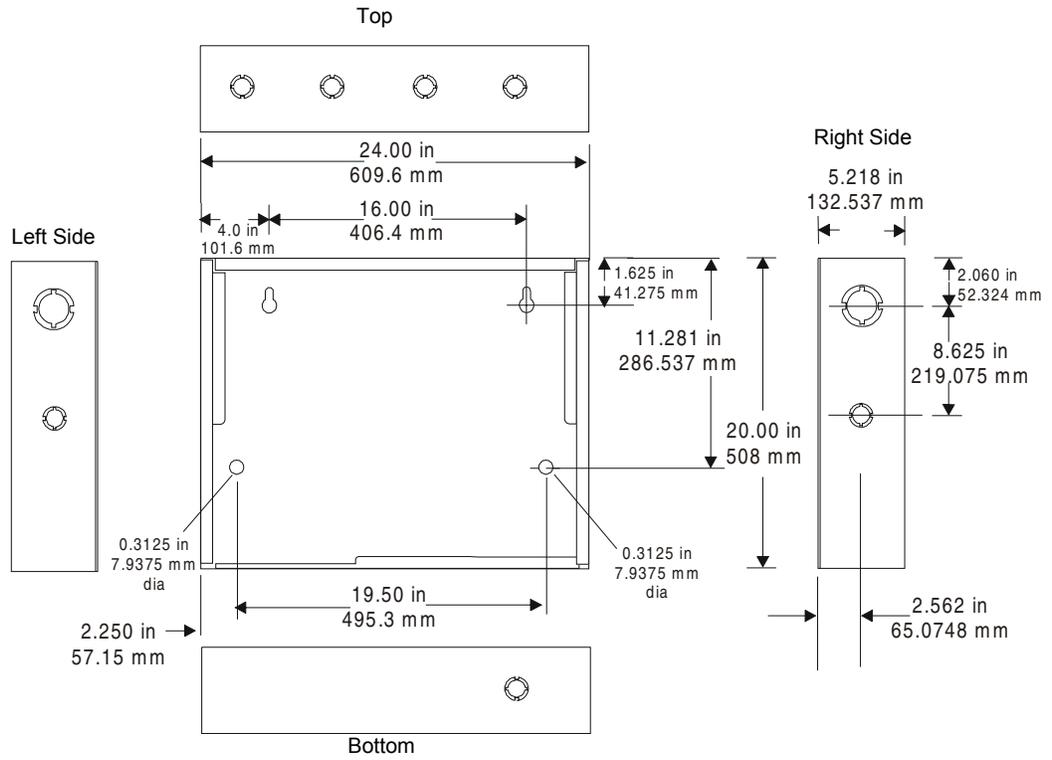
CAB-A3/CAB-A3B Dimensions & Knockout Locations
